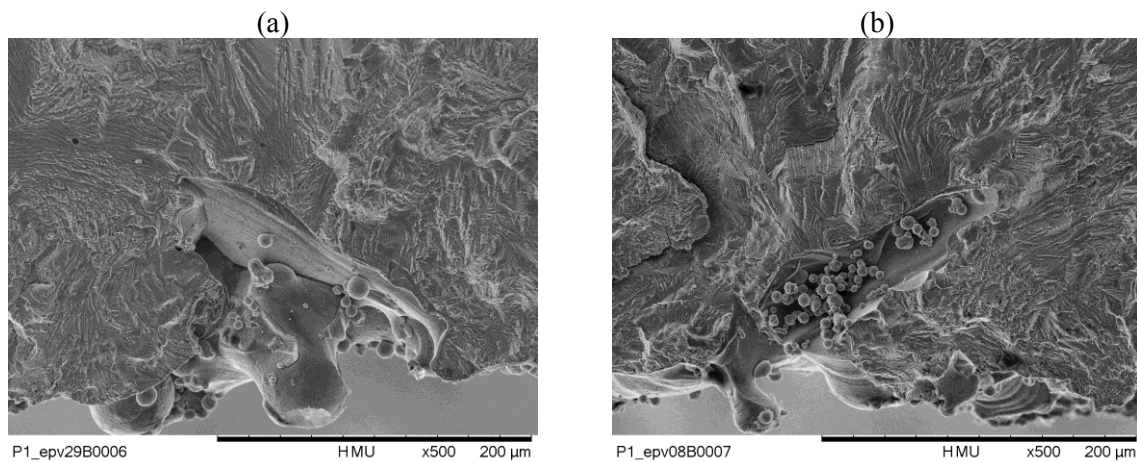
Morphology of defects in as-built specimens: (a) open-form defect; (b) subsurface defect
